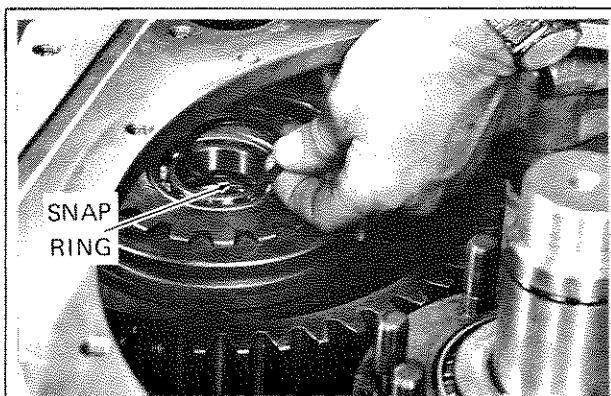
Installation of Intermediate Shaft Assembly (Sheet 1 of 3)
